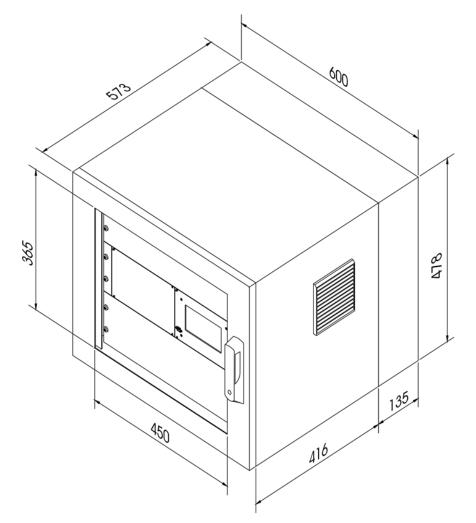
Dimensions of the 19-inch enclosure IP52, model A
